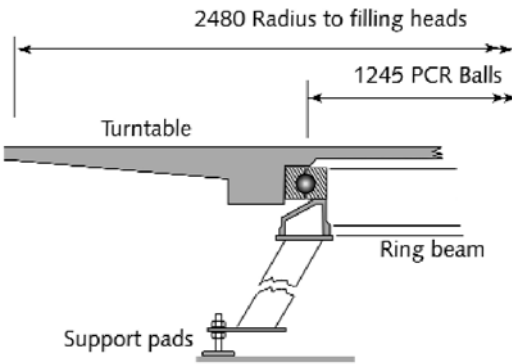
Schematic section of filler showing bearing mounting arrangement (not to scale)
